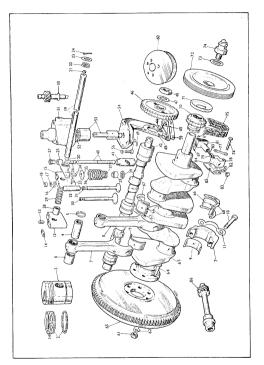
· 1.5 LITRE DIESEL ENGINE CRANKSHAFT · CAMSHAFT ASSEMBLIES
